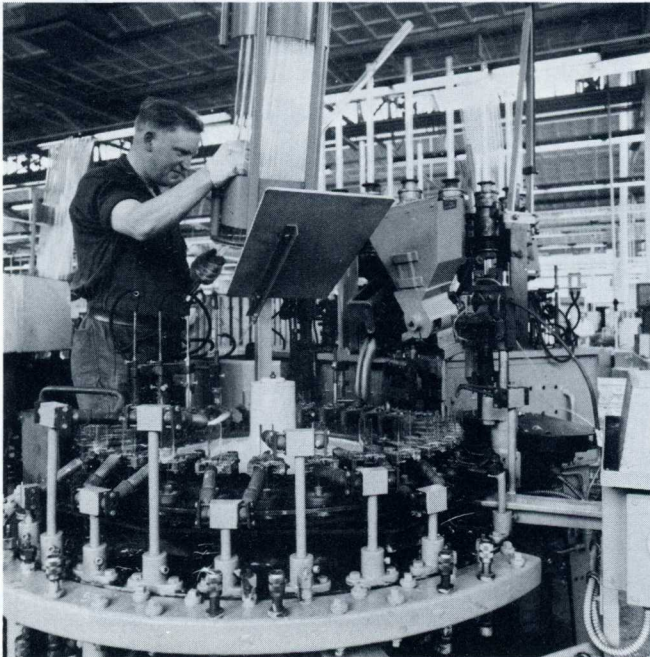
Automatic machine for making envelopes of tube glass and sealing on the exhaust stem.
